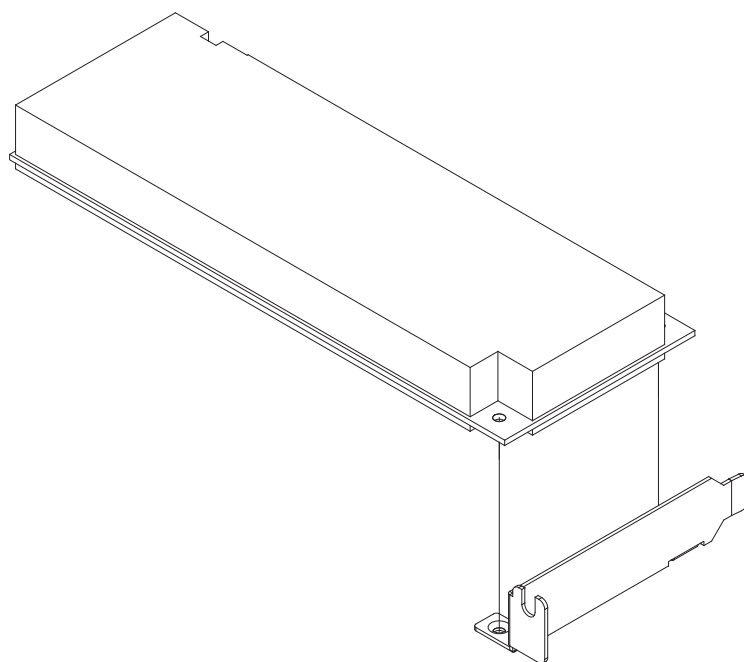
PCIe expansion Card Assembly/PCIe 扩充卡安装 /PCIe 擴充卡安裝
